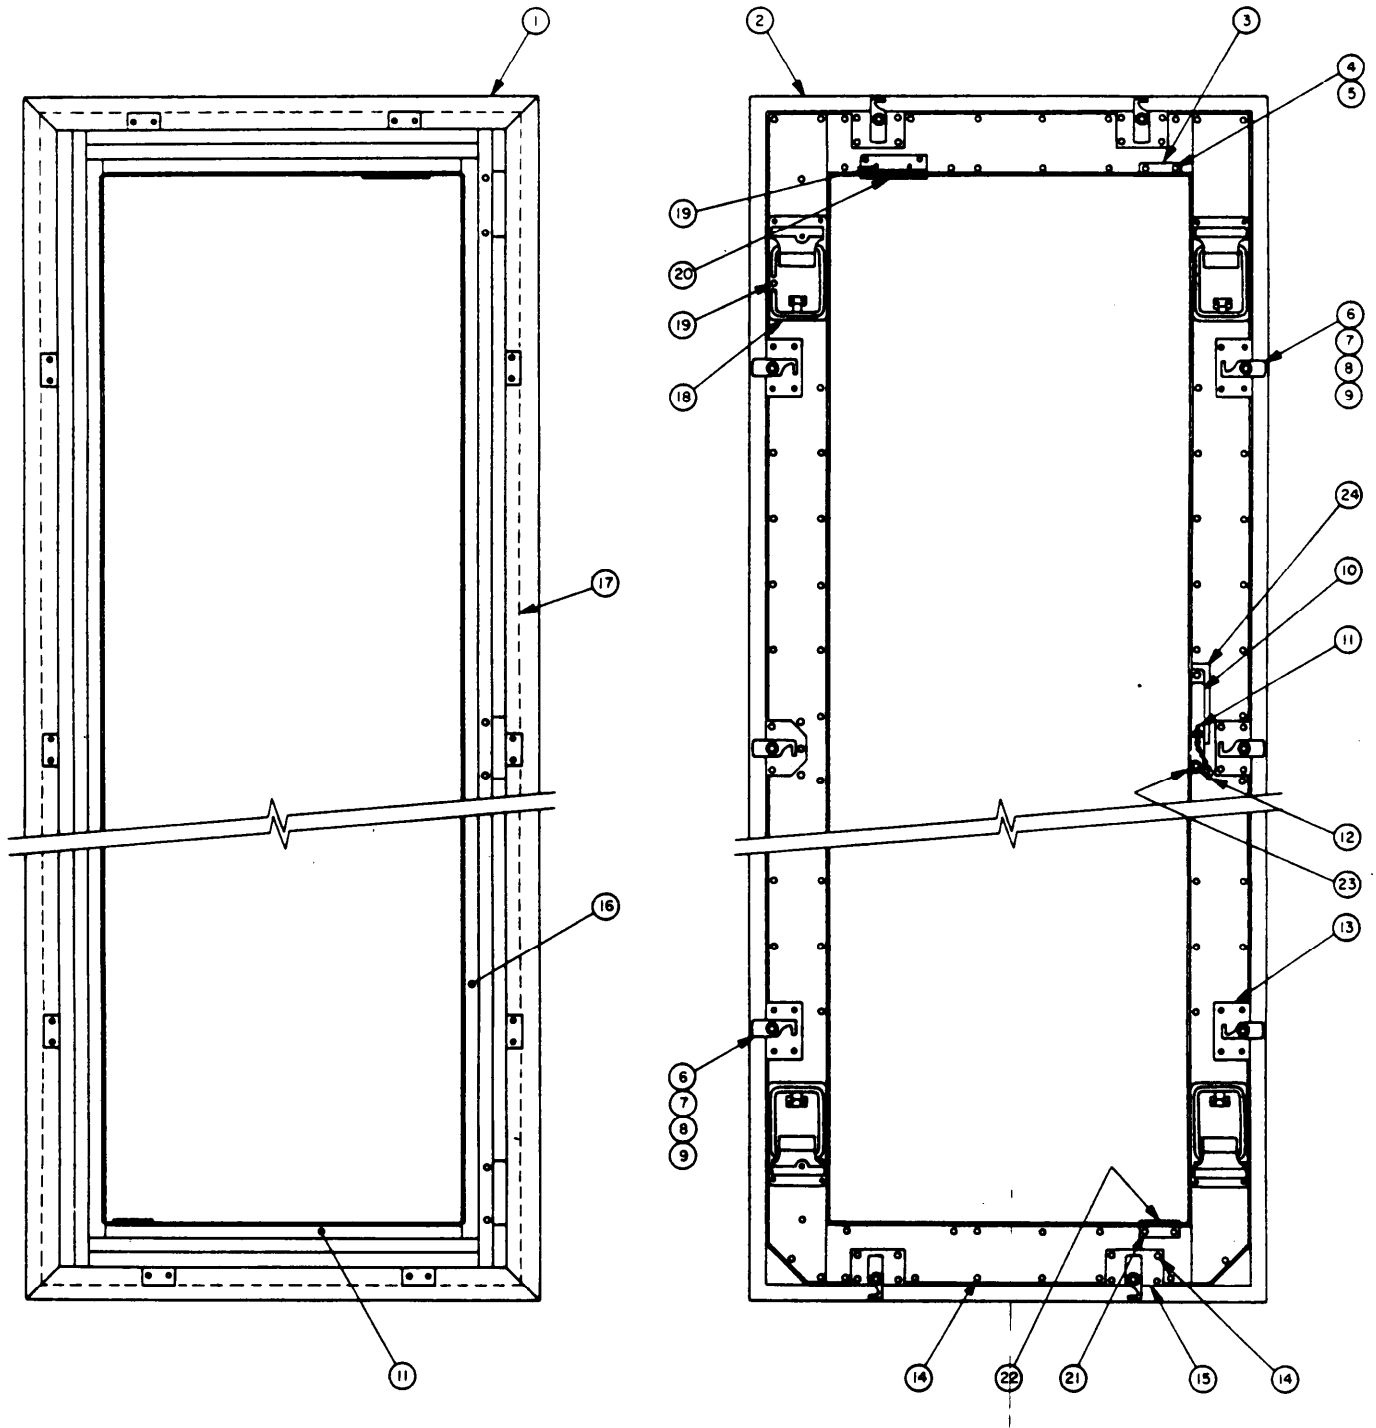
Panel Assembly, Door End (Sheet 1 of 2)
